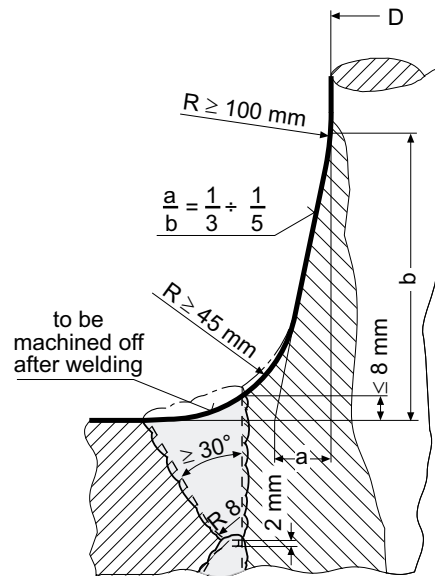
Welded joint between rudder shaft and coupling flange
